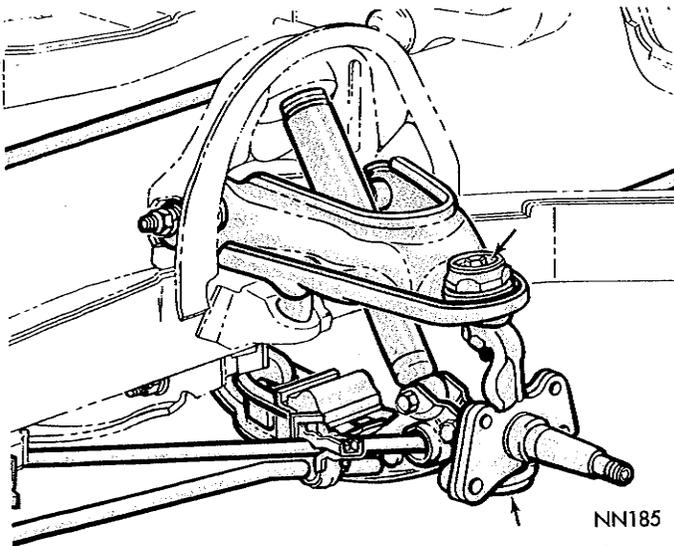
Upper and Lower Ball Joint Lubrication Points (Fury Models)
